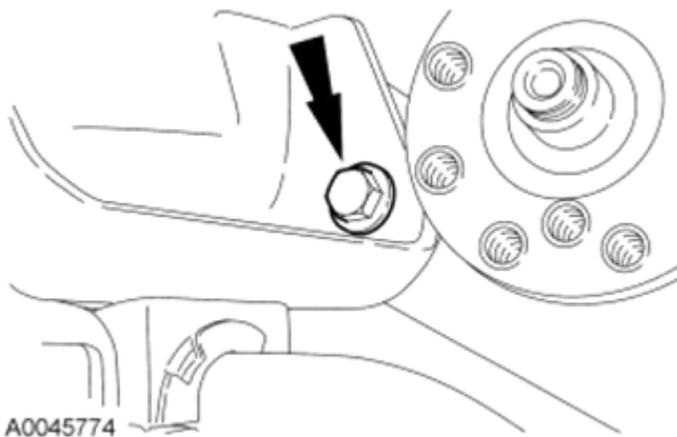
Locating Lower Front Axle Carrier Mounting Bushing Bolt
